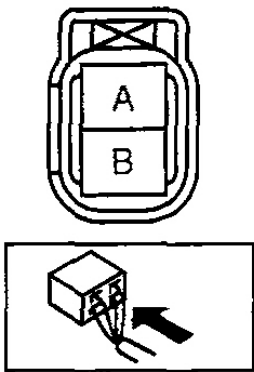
Identifying Fuel Injector Terminals A & B Using Tester
